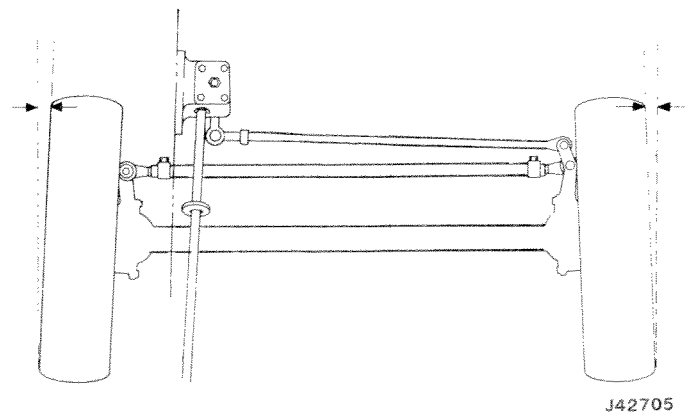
Front Wheel Toe-In (Top View)—Typical
